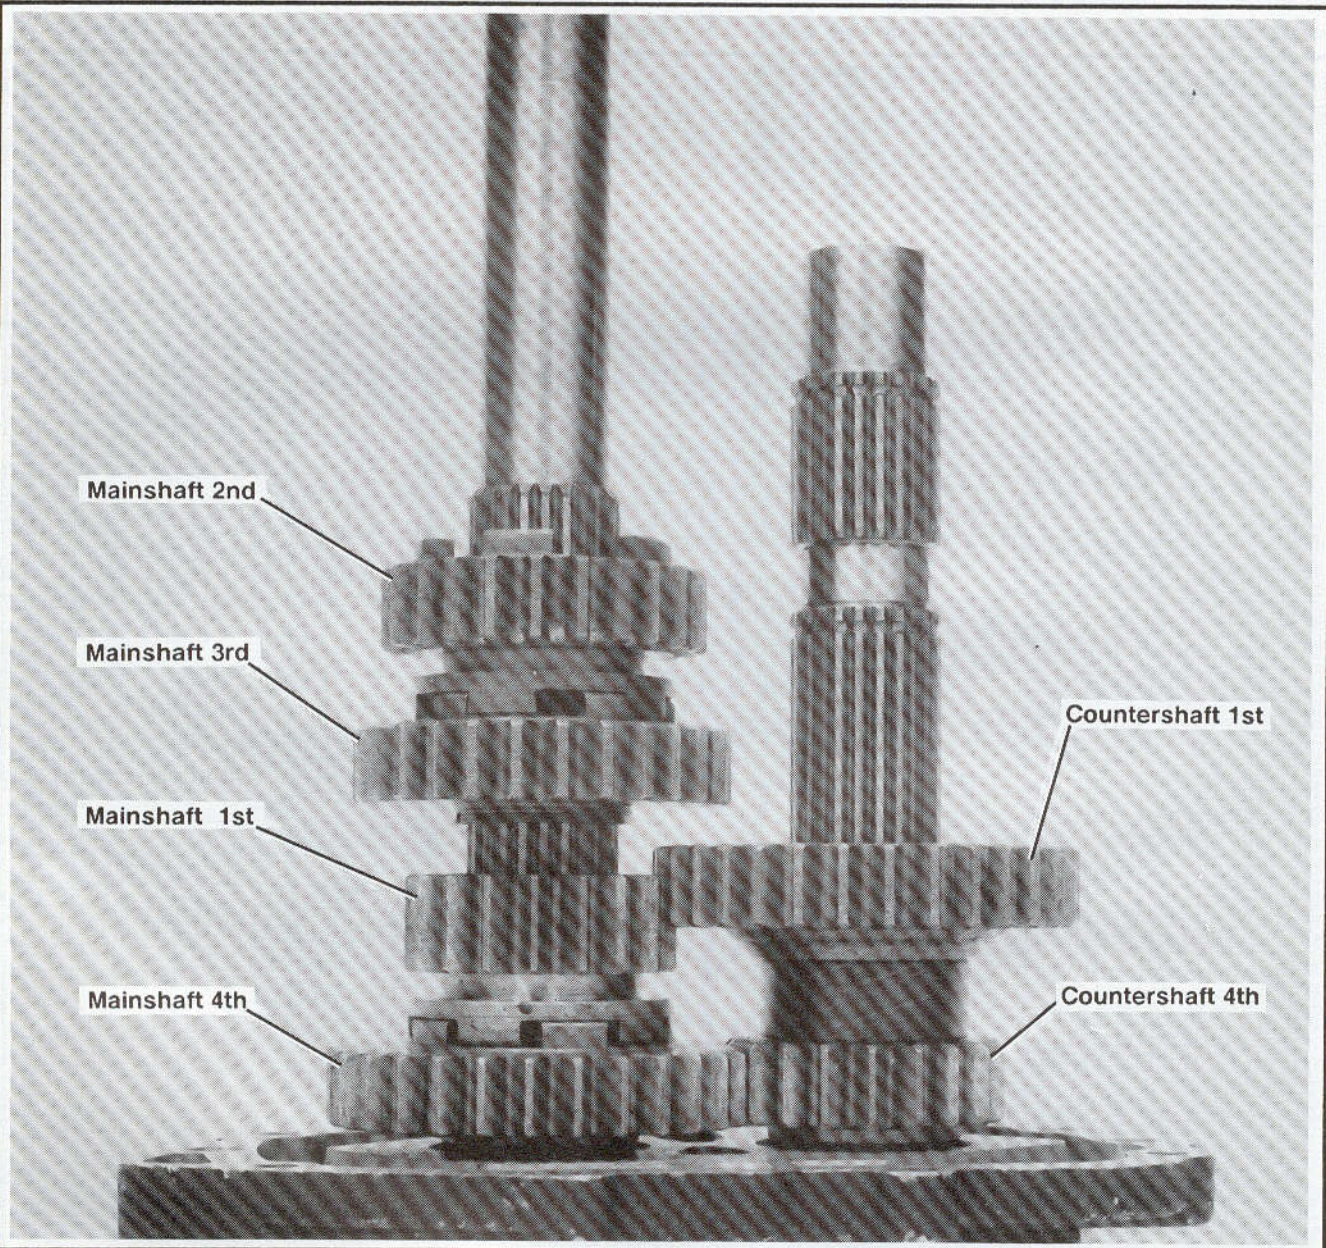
2nd, 3rd Gear on Mainshaft
